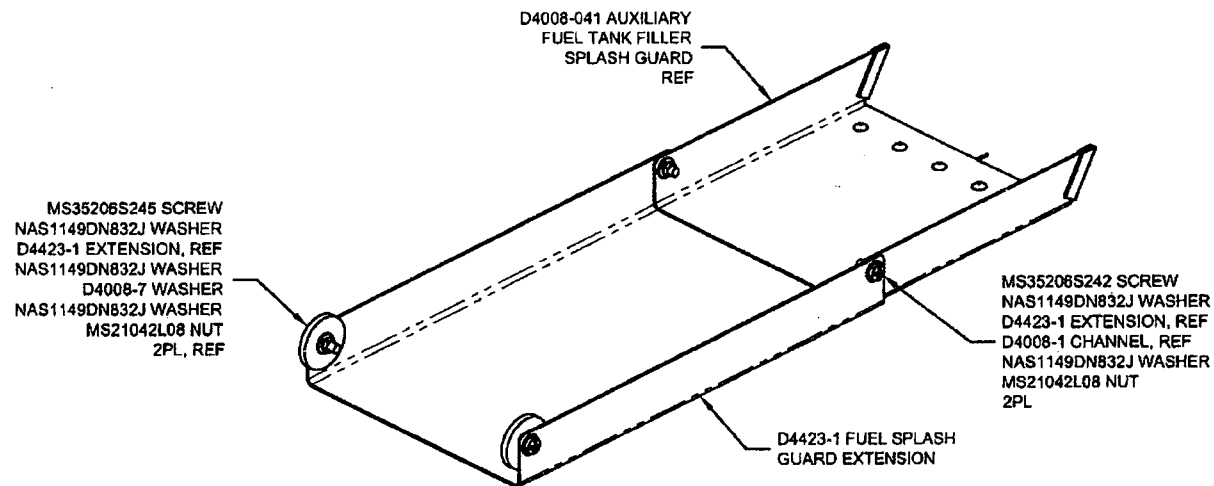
INSTALLATION ON SQUIRREL CHEEK FLOOR
